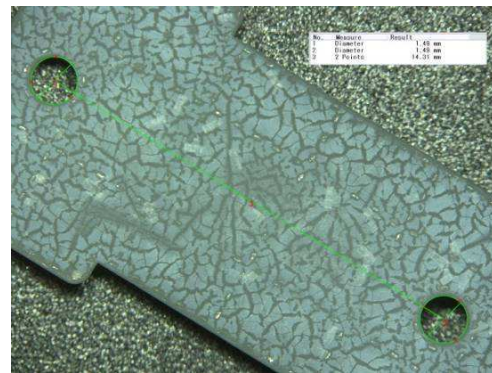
BA01SLA moulding block, bottom side (magnified 20×)
